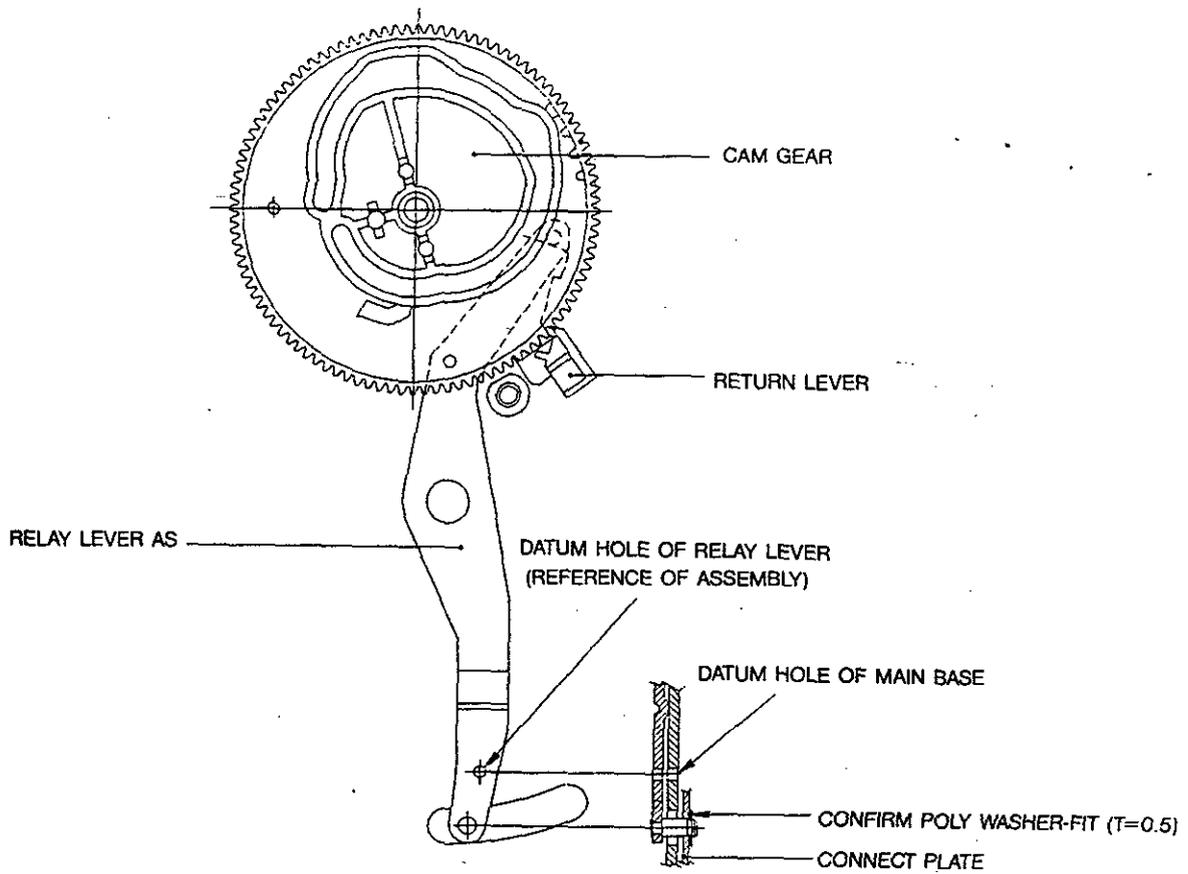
Reference of assembly for the Cam Gear and Relay Lever
